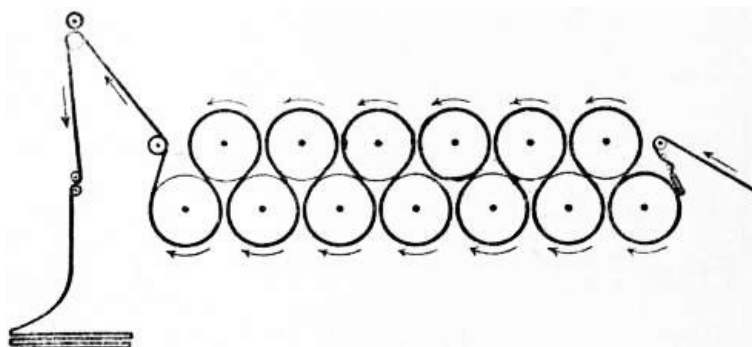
Diagram showing the Horizontal Drying Machine threaded with Cloth.
